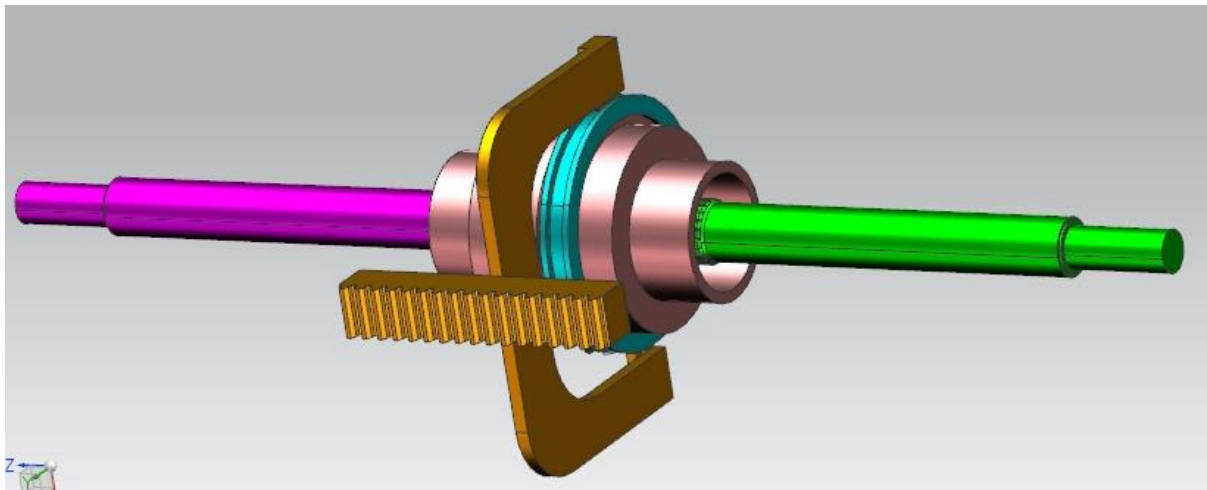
3-D CAD model of the semi-automatic differential locking mechanism showing the rack-and-pinion actuator, carriage housing, and dual-shaft configuration
